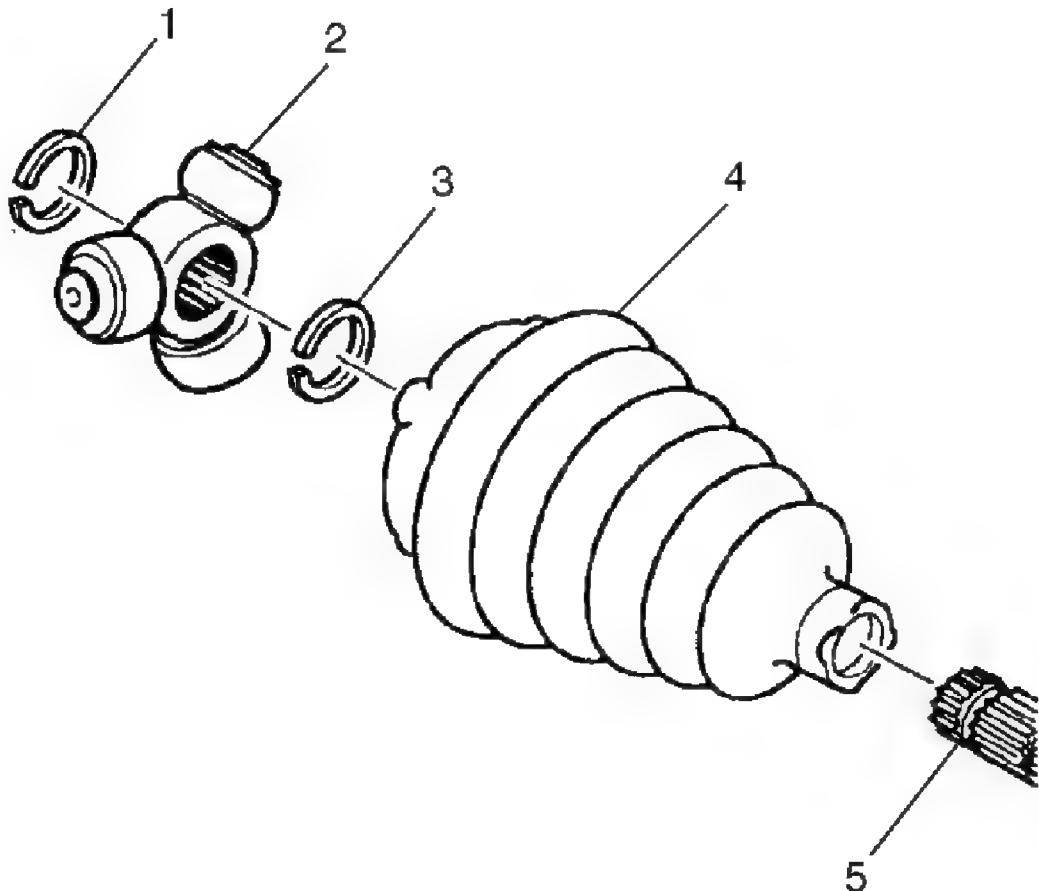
View Of Spider Assembly, Rings & Tripot Boot
